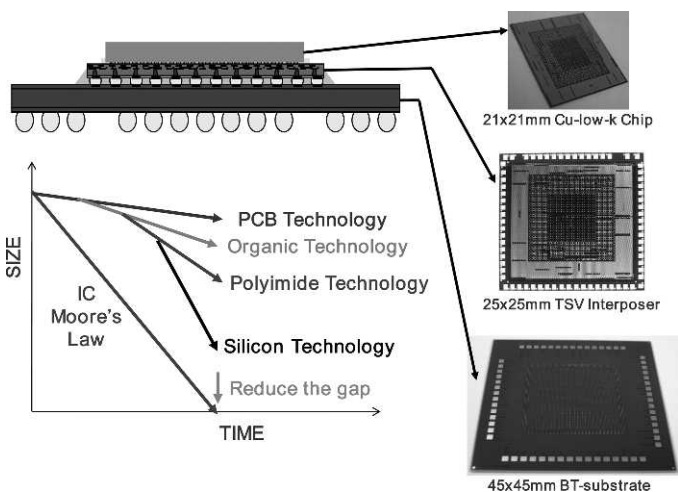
A high-performance chip supported by a passive TSV interposer soldered on a BT substrate.
